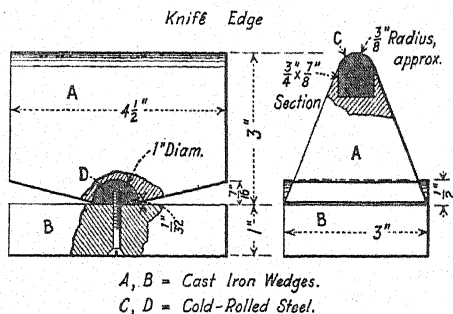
Self-Adjusting Knife-Edge Bearing and Load-Application Device.
